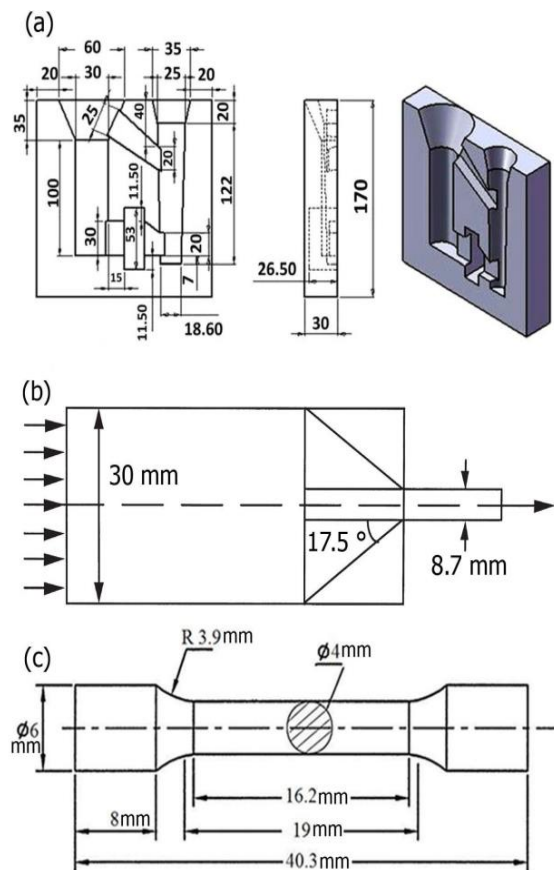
Schematic representation of (a) casting mold, (b) extrusion mold, and (c) tensile test specimen.
